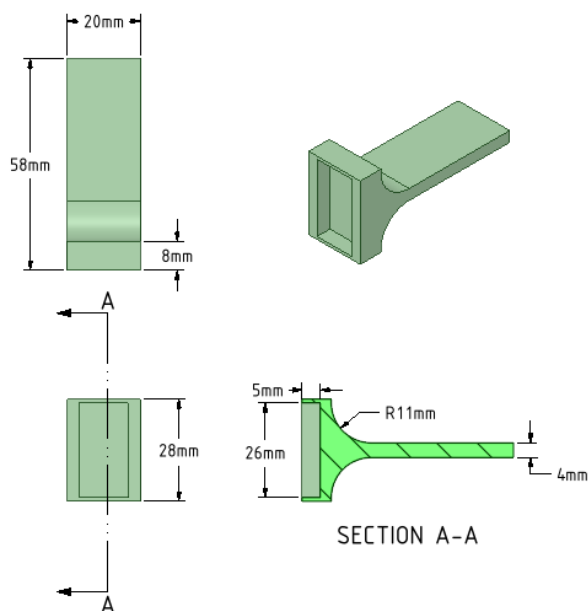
Schematic of the designed PLA tabs for the fracture specimens.
